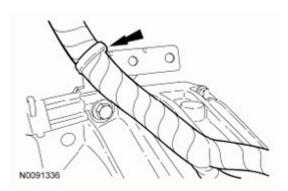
Locating HO2S Sensor Electrical Connector And Retainer Courtesy of FORD MOTOR CO.
